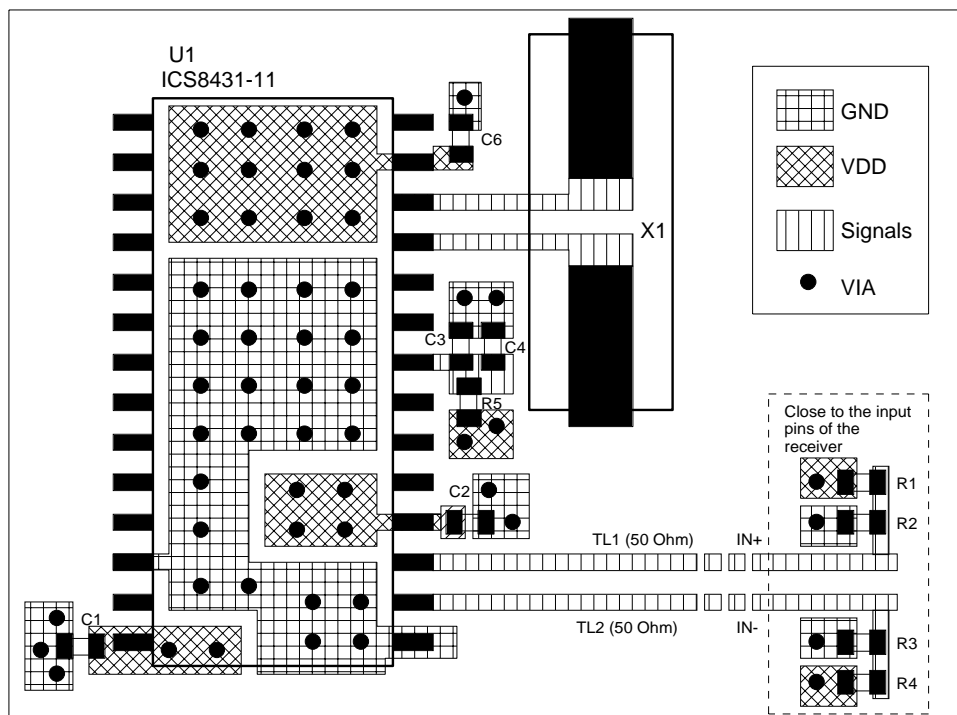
B. PCB BOARD LAYOUT FOR ICS8431-11
